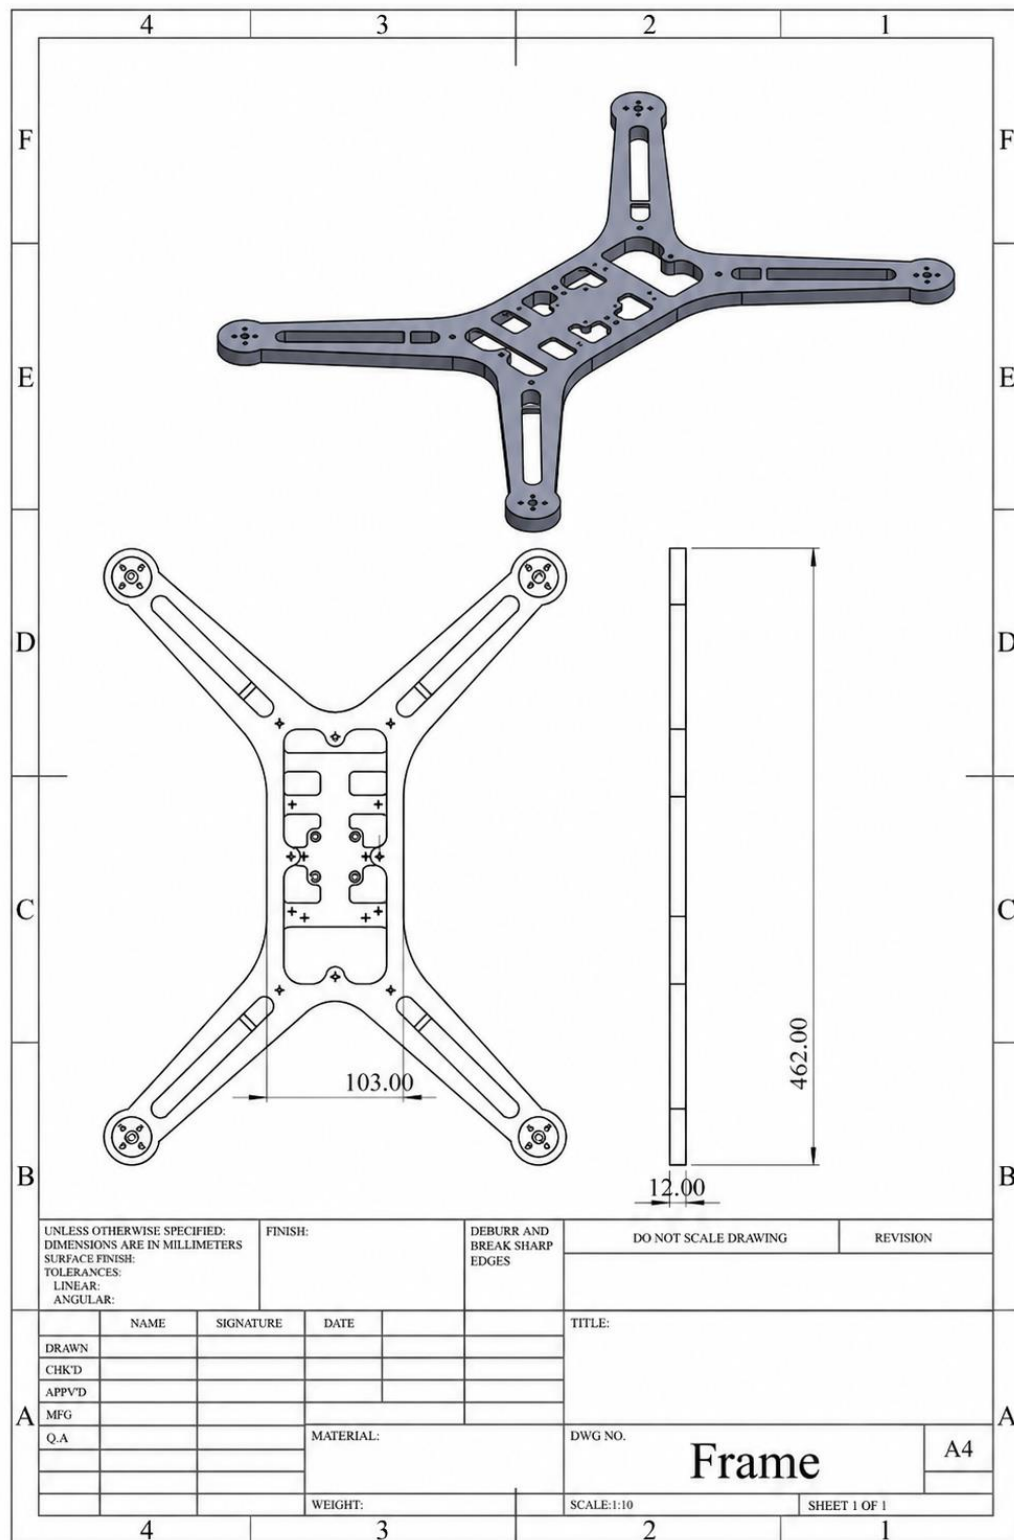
Frame dimensional specifications showing top and isometric views with critical dimensions.
